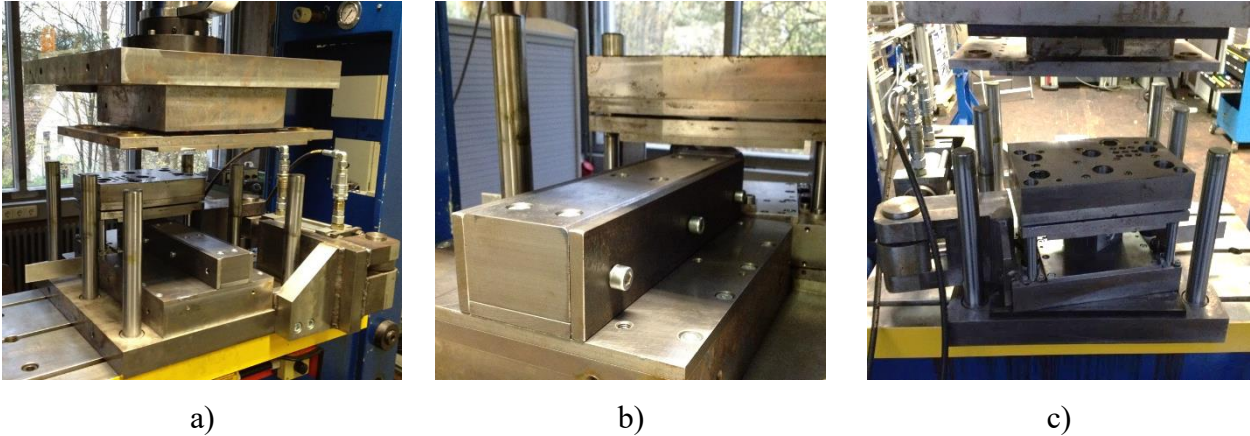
Early stage of the ISB research tool prototype showing a) the upper and lower stationary clamping unit, b) the guiding part of the mandrel in the stationary unit and c) the rotatory clamping unit, pivoted by the maximum tool angle.
